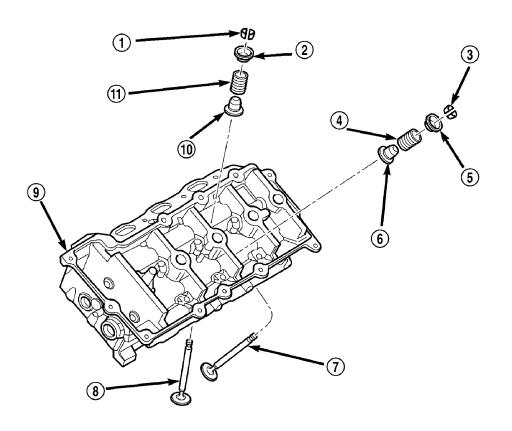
Removing/Installing Valve Stem Seal Courtesy of CHRYSLER LLC
